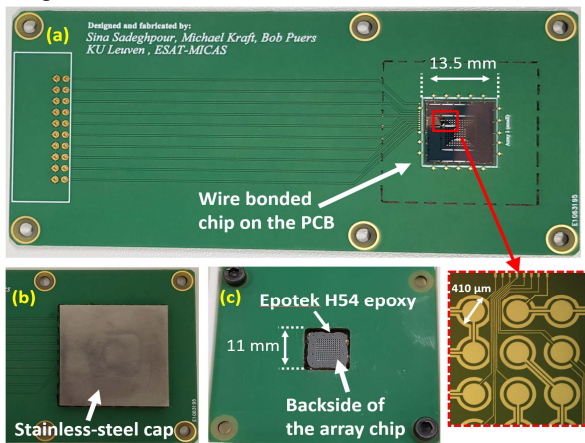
(a) Wire-bonded PMUT array chip on the PCB; (b) stainless-steel cap to encapsulate the front side of the chip; (c) backside of the chip.
